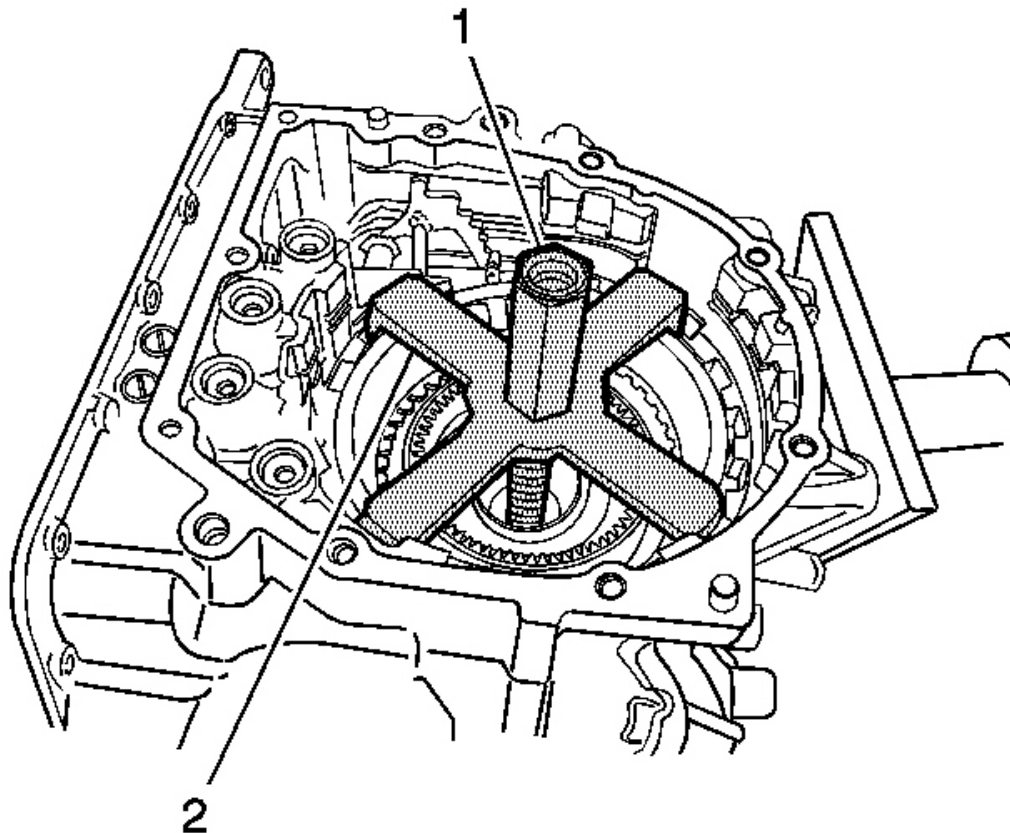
DT 46455, DT 46457, Snap Ring Of 1st & Reverse Brake
